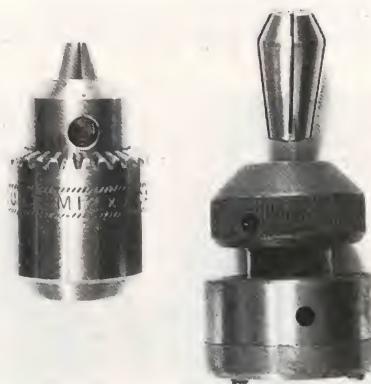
A drill chuck (left) and a collet chuck. The disadvantage of the collet chuck is that it requires a different collet (the piece shown above the chuck) for each drill size or tool shank.
